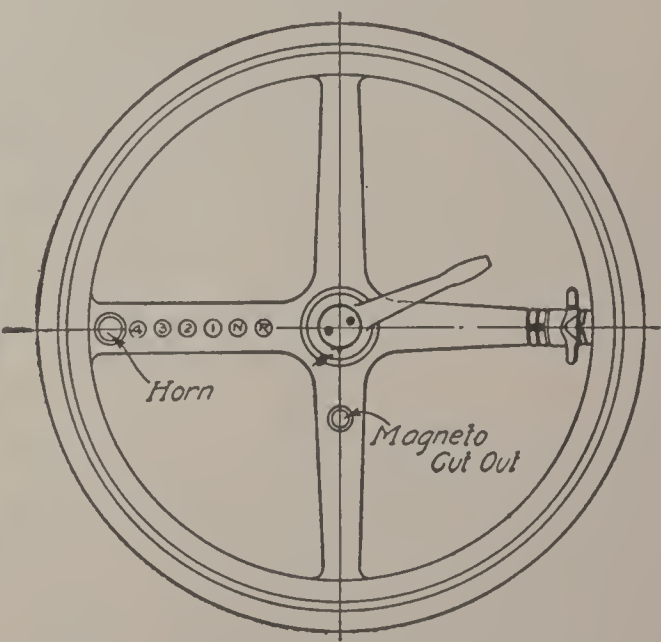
Another Arrangement of Buttons for Gear Shifting
